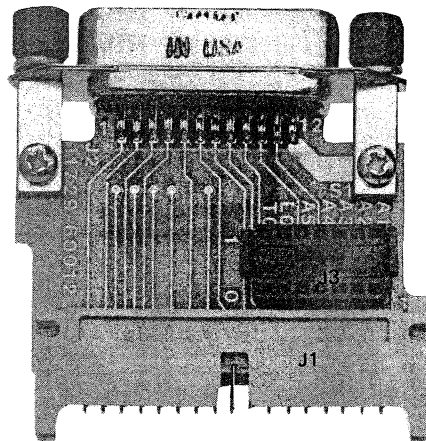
HP-IB Interconnect Board Assembly Component Locations
